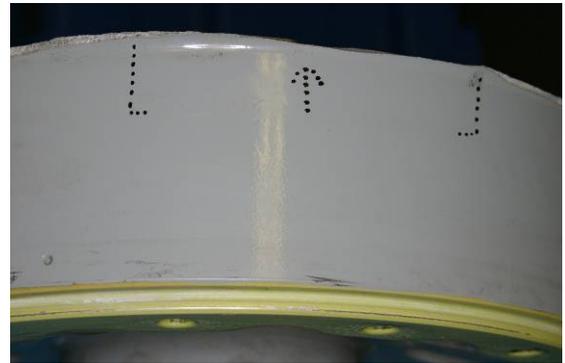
Cylindrical surface of the inner rim half, with the fatigue crack origin and extent of propagation marked.
